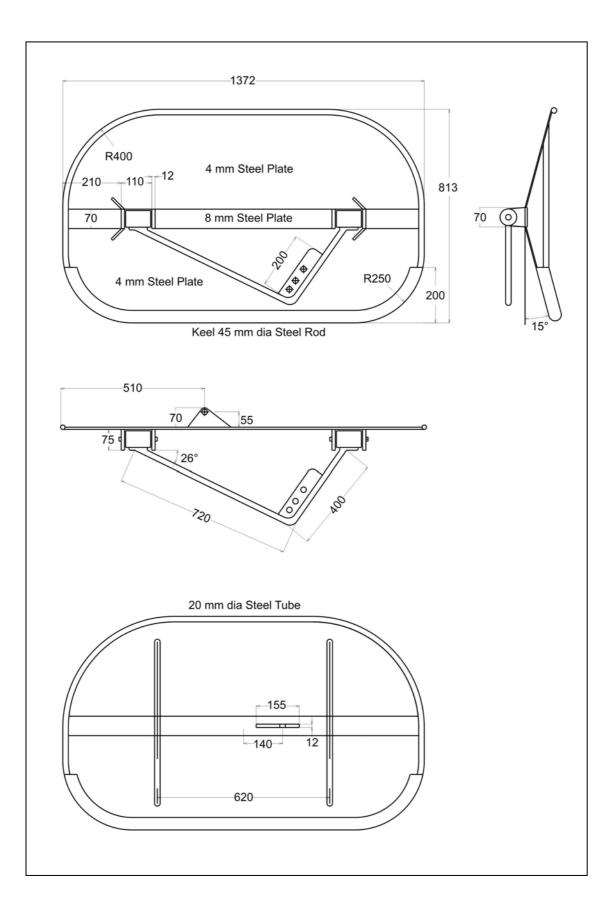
Design details of V-type otter boards (1372 x 813 mm; 80 kg each)
